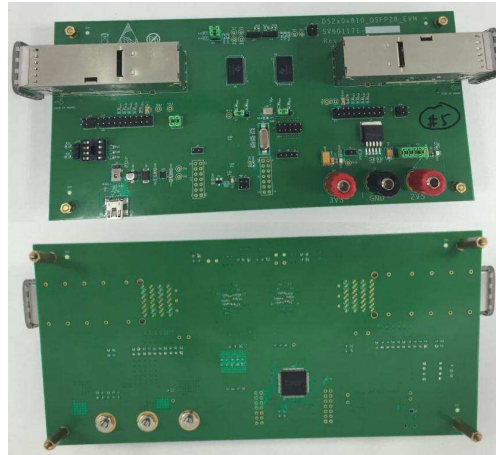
DS280BR810 QSFP28 Reference Design Board (Top and Bottom)
